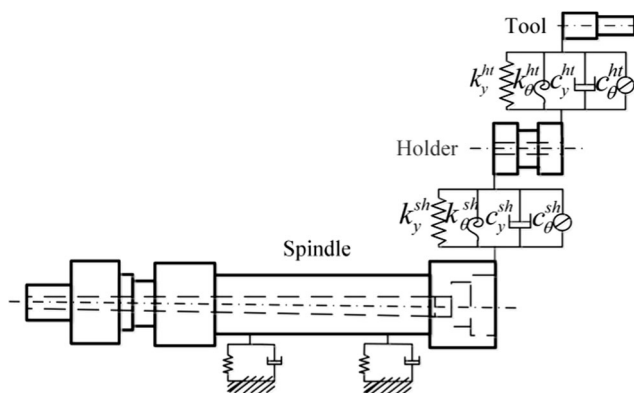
Dynamic model of the spindle-holder-tool assembly
